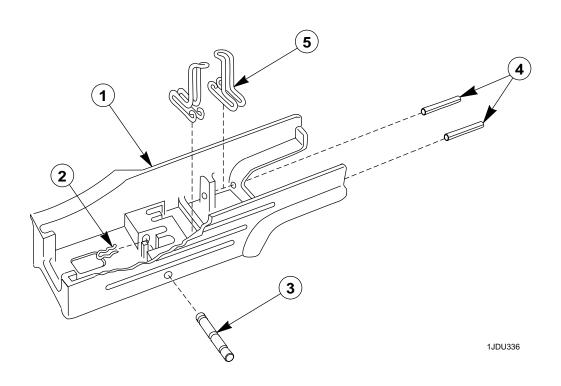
B. GUARD, HAND, GUN ASSEMBLY (NEW STYLE)
